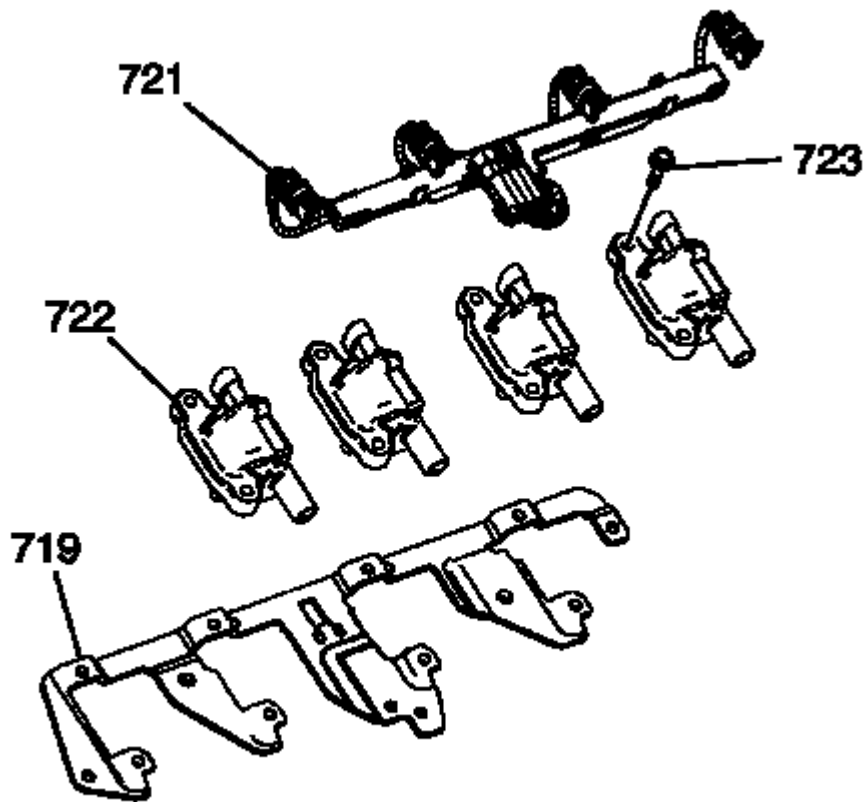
View Of Bracket, Bolts, Coils & Wire Harness
